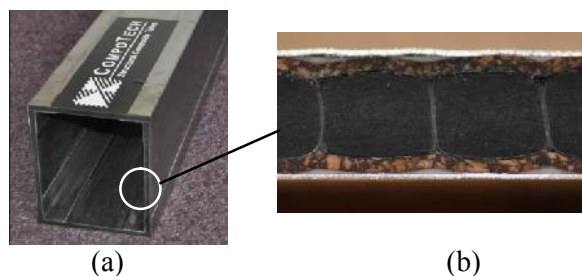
A thin-walled sandwich beam (a) and a detail of its wall (b) containing metal coverings, cork layers and high modulus sub-cell structure
